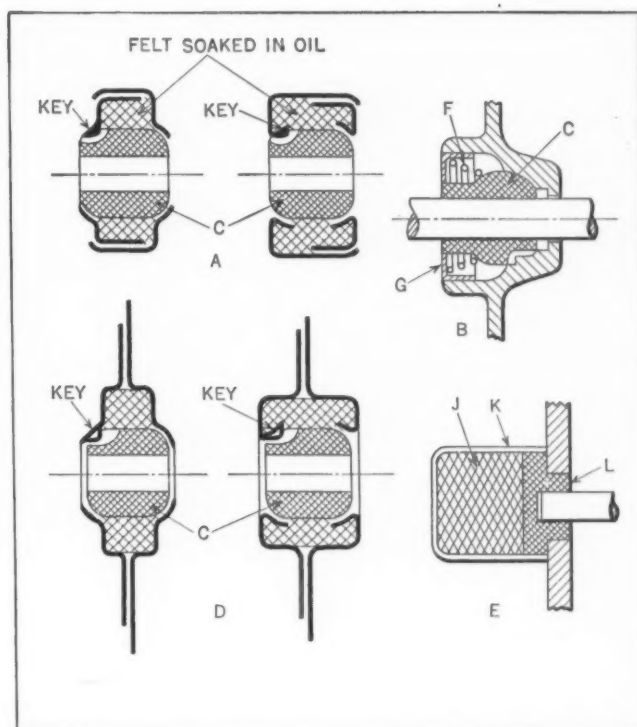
Examples of Shaft Bearing Assemblies in which Self-lubricating Bushings are Used
